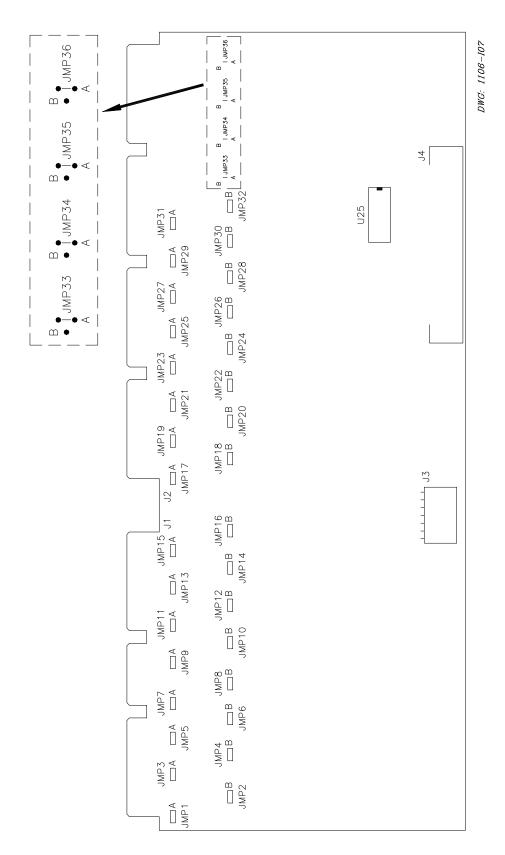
SEL-2020 Optional I/O Board Jumper Location
